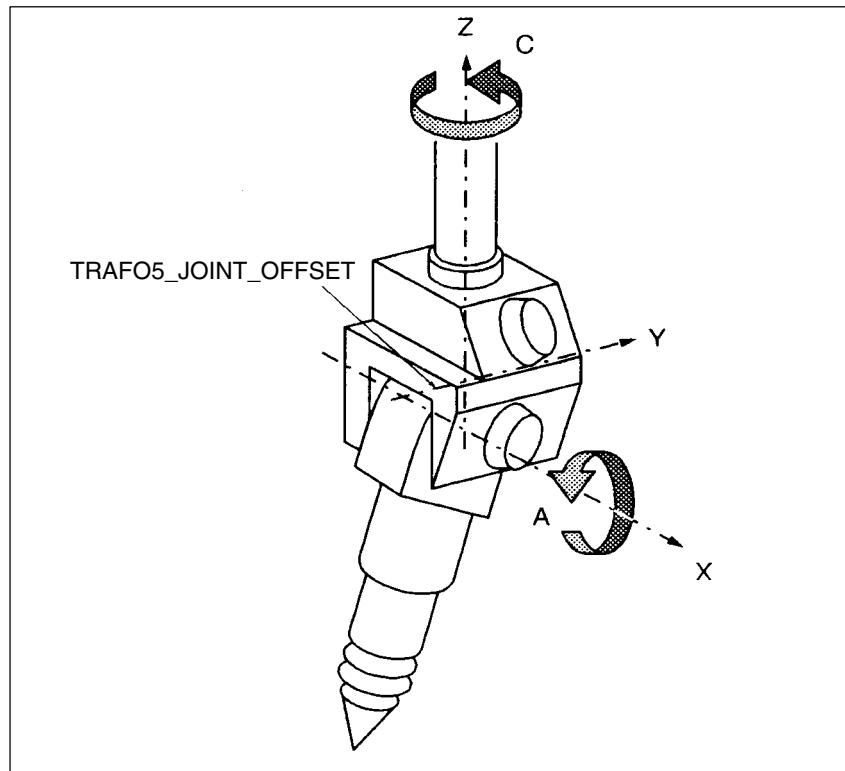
Example of MD: TRAF05\_JOINT\_OFFSET (joint offset for a 5-axis machine with two-axis swivel head for tools) (e.g. laser machining with machine type 1)
